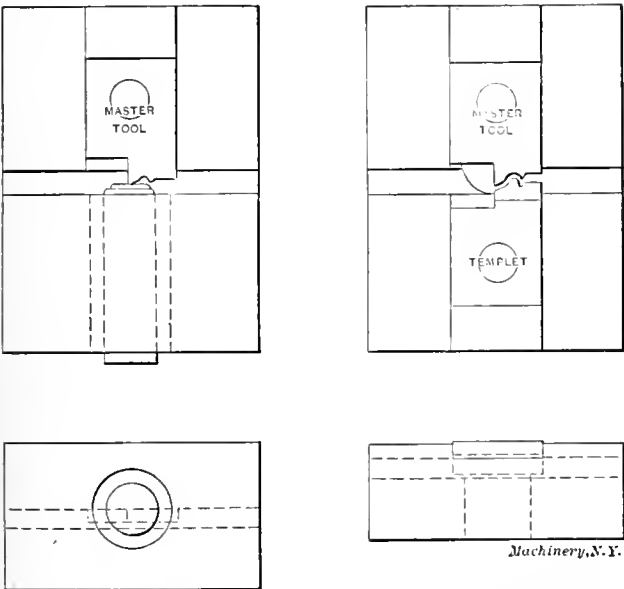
Filing Jig for Templates and Master Tools, with Arbor for Holding the Eyelet. Fig. 3. Filing Jig for Master Tools.
